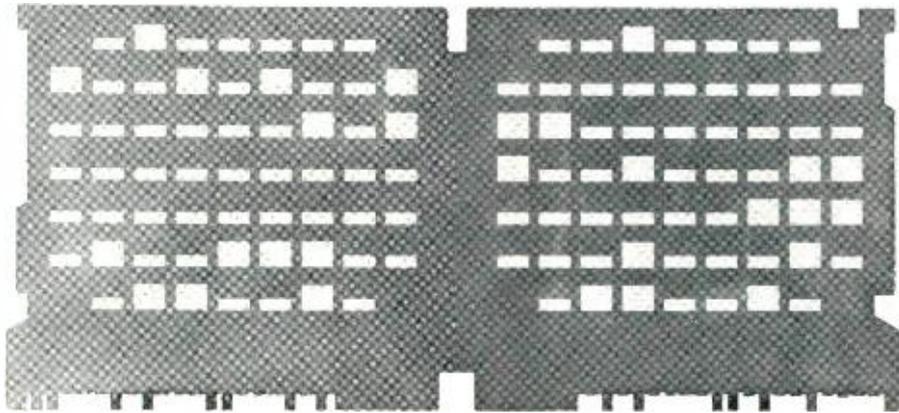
Typical metal translator card, with required pattern of holes enlarged.
